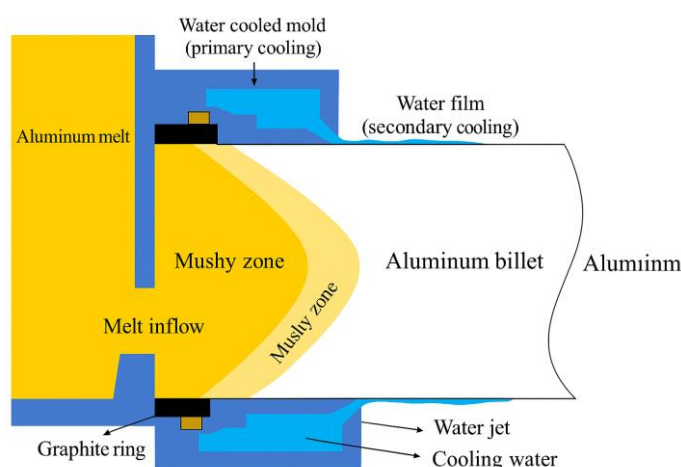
Schematic diagram of the horizontal direct chill casting process for aluminum alloys [7].
